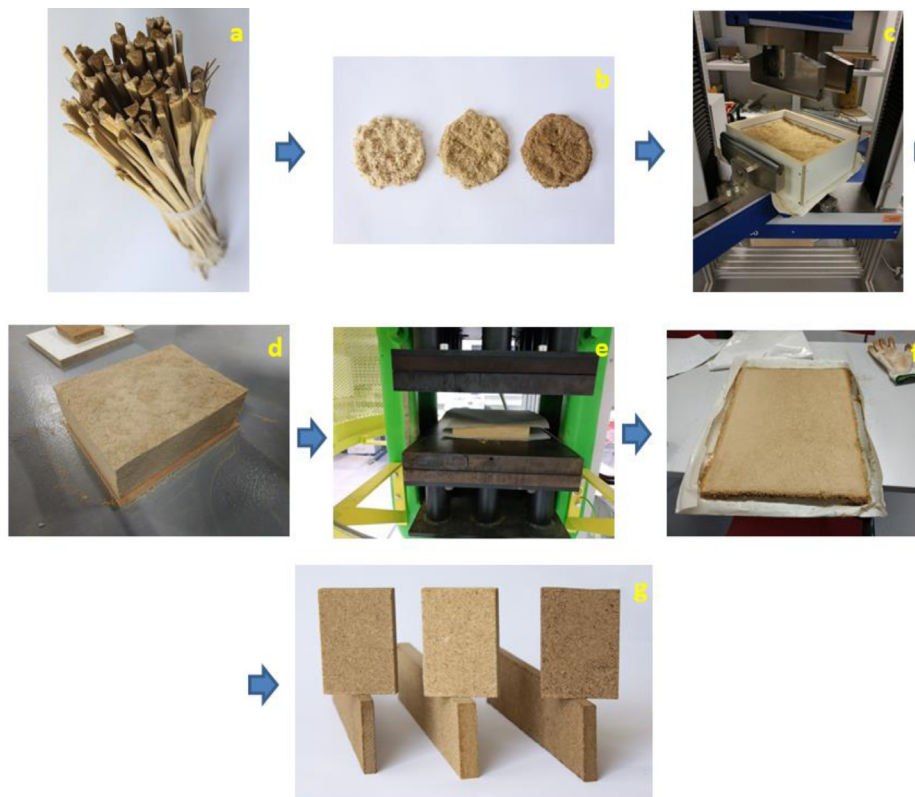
The board production scheme. (a) dried totora stems, (b) disintegrated totora tissue, (c) pre-pressing, (d) pre-pressed totora mat, (e) pre-pressed mat in the hot press, (f) pressed board, (g) cut samples.
